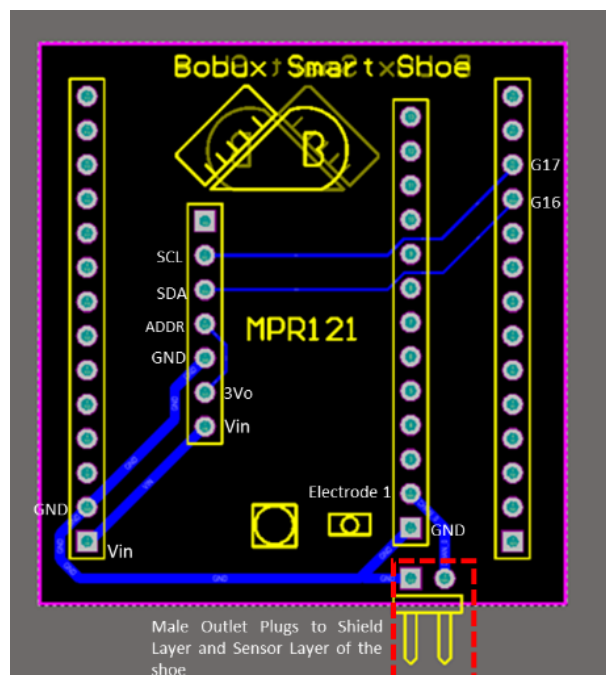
Electrical Schematic of connections of the custom made PCB Shield
